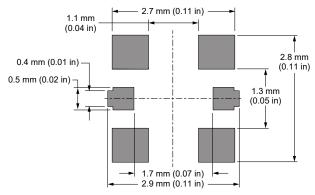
Recommended PCB Dimensions for the CONSWF001-SMD
